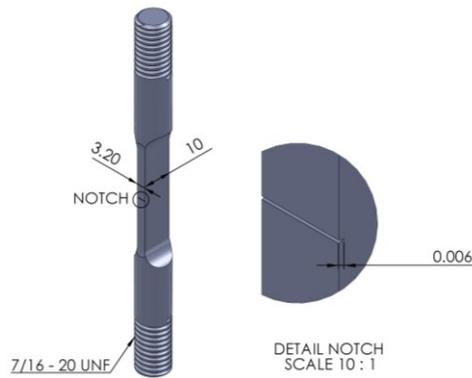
Single edge notch (SEN) specimens were made of 7xxx series aluminum alloy. All dimensions in millimeters.
